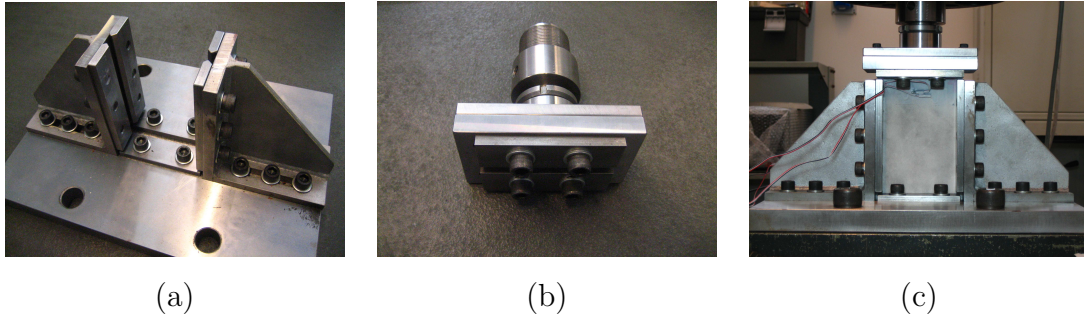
CAI test fixture: (a) base support, (b) top support adapted for the crosshead test machine, and (c) whole fixture.
